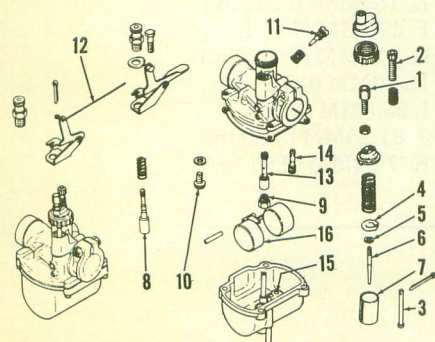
Exploded view of Mikuni VM carburetor. Starting valves for both carburetors are connected with rod (12).
